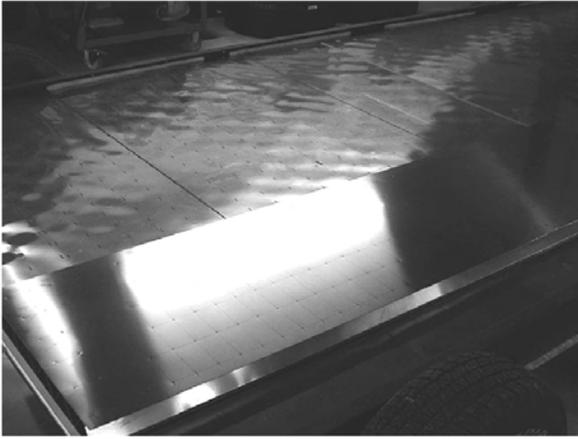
Sample resistance welded roof panel on top of laser welded roof.
